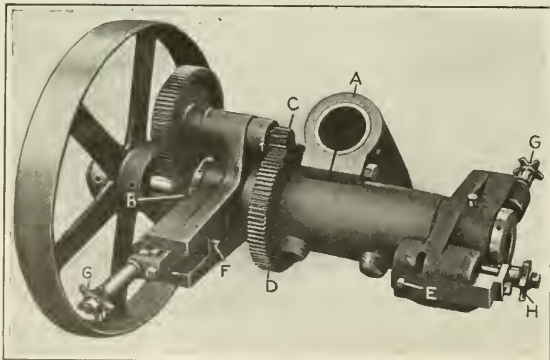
Close View of Boring and Facing Equipment removed from Lathe Head to show Features of Design
